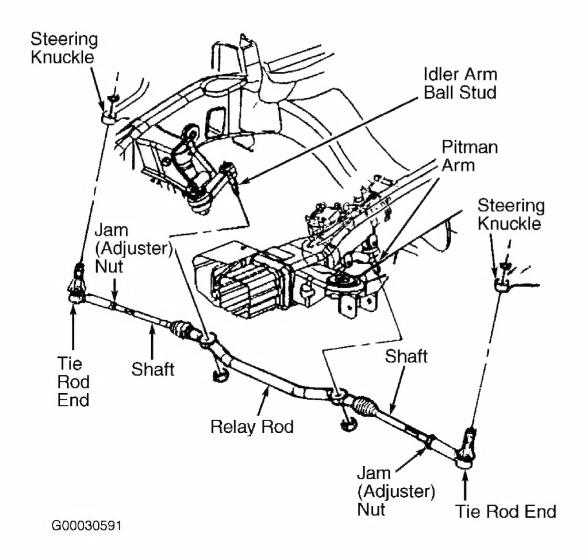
Exploded View Of Steering Linkage ("C/K" Series - New Style) Courtesy of GENERAL MOTORS CORP.
